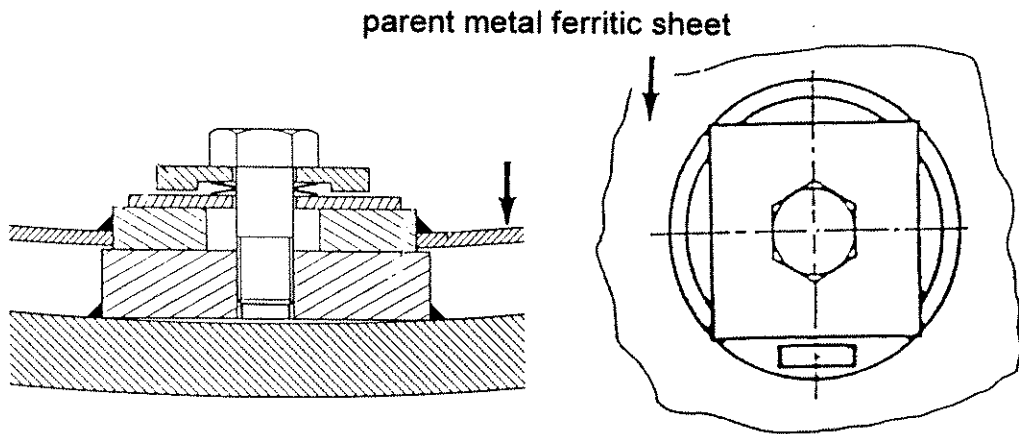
Fixing bearing pad of 13 % Cr steel plates which protect against erosion-corrosion the inner part of vessels of moisture separator reheaters.
